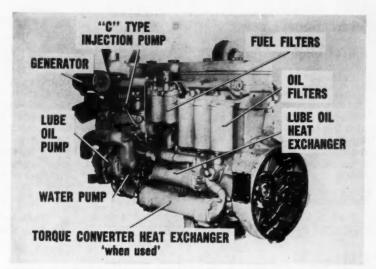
Left side of the International 817 diesel engine showing externally mounted oil and water pumps. A scavenging oil pump can be included to provide high-angle operation.
